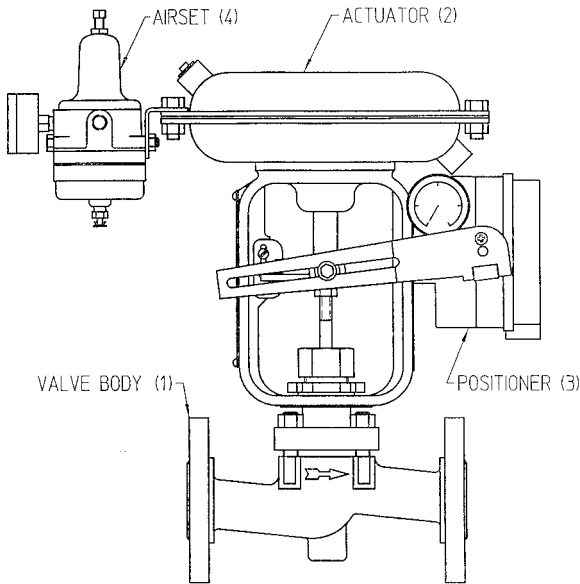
Typical globe-style control-valve assembly with various components. (Courtesy of H.D. Baumann, Inc.).
